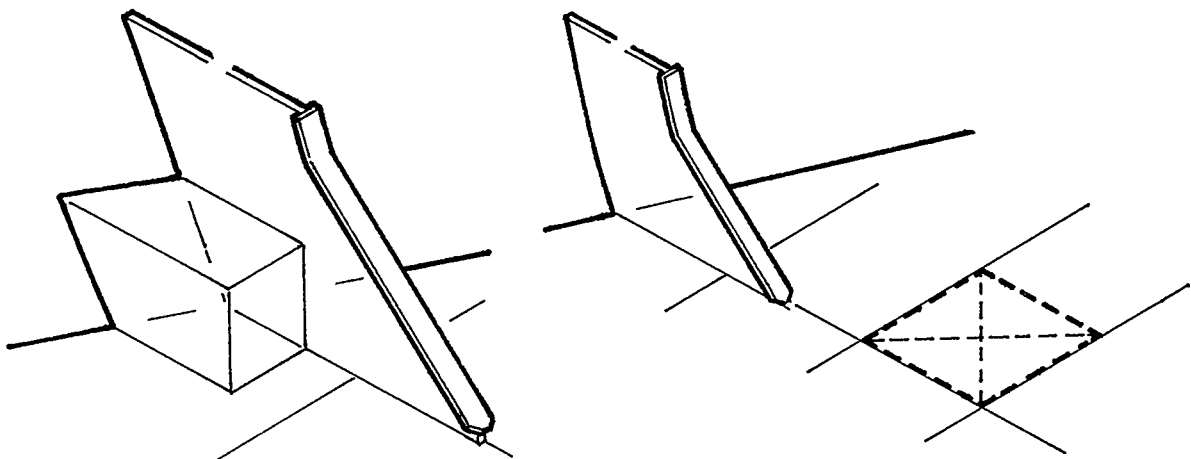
Marking Beams and Longitudinal Stiffeners and Providing for Sea Chests.
